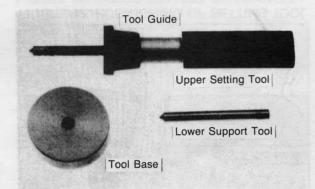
TOOL GUIDE AND SETTING TOOL
